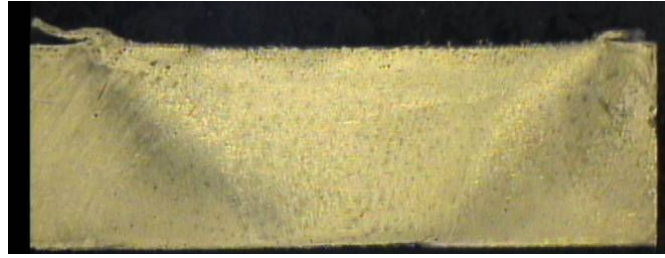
Cross section of weld produced under rotation force control mode.
